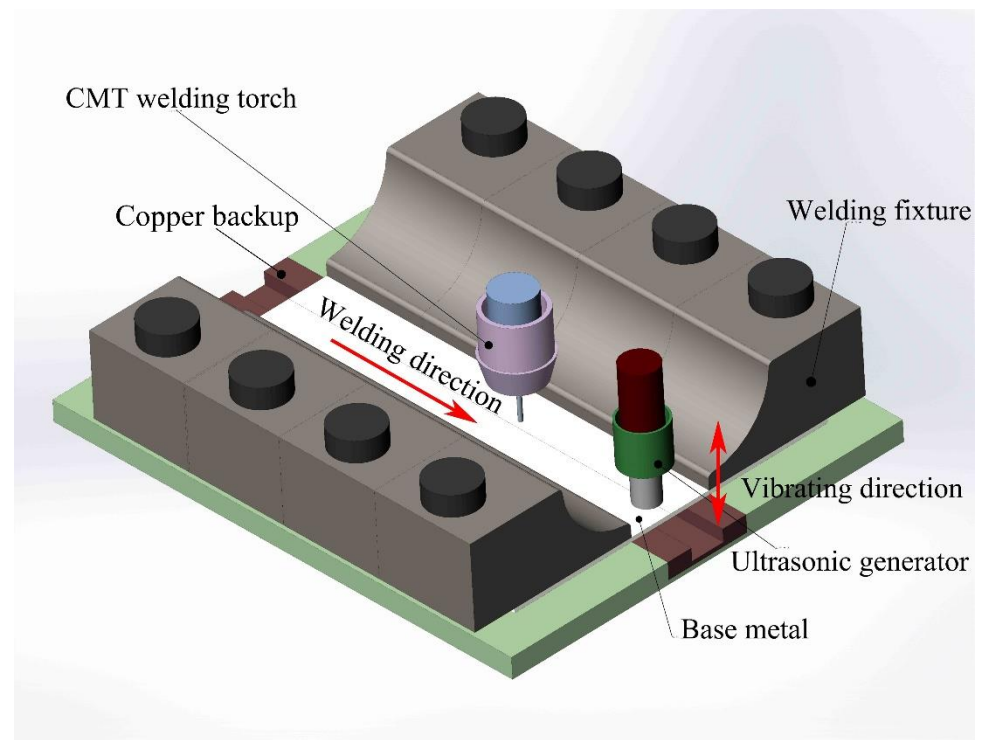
Schematic of ultrasonic vibration-assisted CMT welding.
